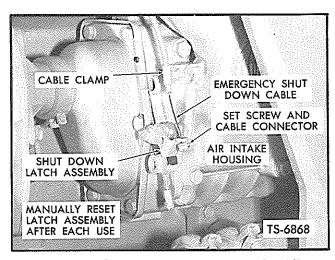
Adjust Engine Air (Emergency) Shut-Off Control — G.M.
